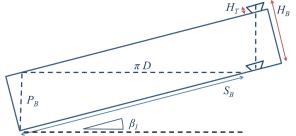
A band laid out flat showing the dimensions of one wrap. Only one tooth is shown on the top and bottom edge.
